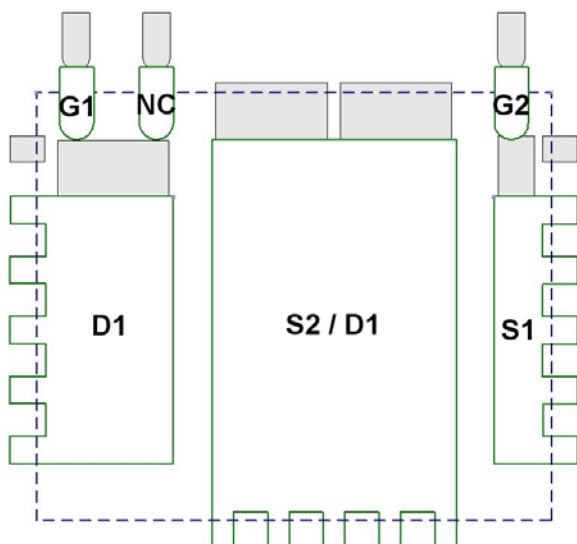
Drawing of skewed mounting (extreme), pre-reflow
